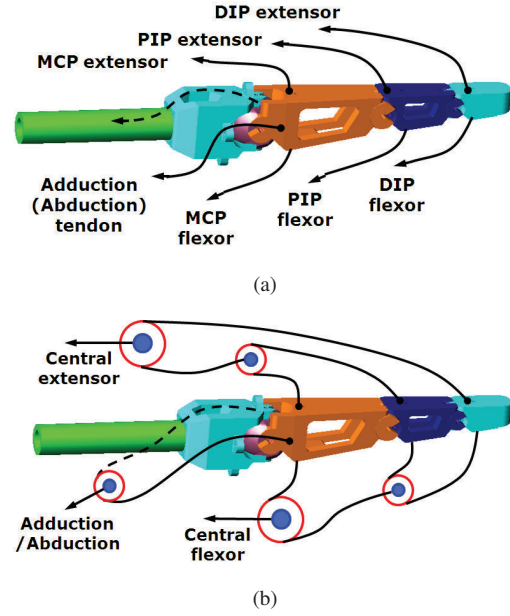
Schematic drawing of two possible cable routing types. (a) A 4-DOF finger with four pairs of antagonistic cables (Note: cables originated from the DIP and PIP finger segments were passing through the center of the cable tubes in the real robotic hand, for better illustration, their routings are drawn explicitly). (b) A 3-DOF under-actuated finger with pulley systems.
